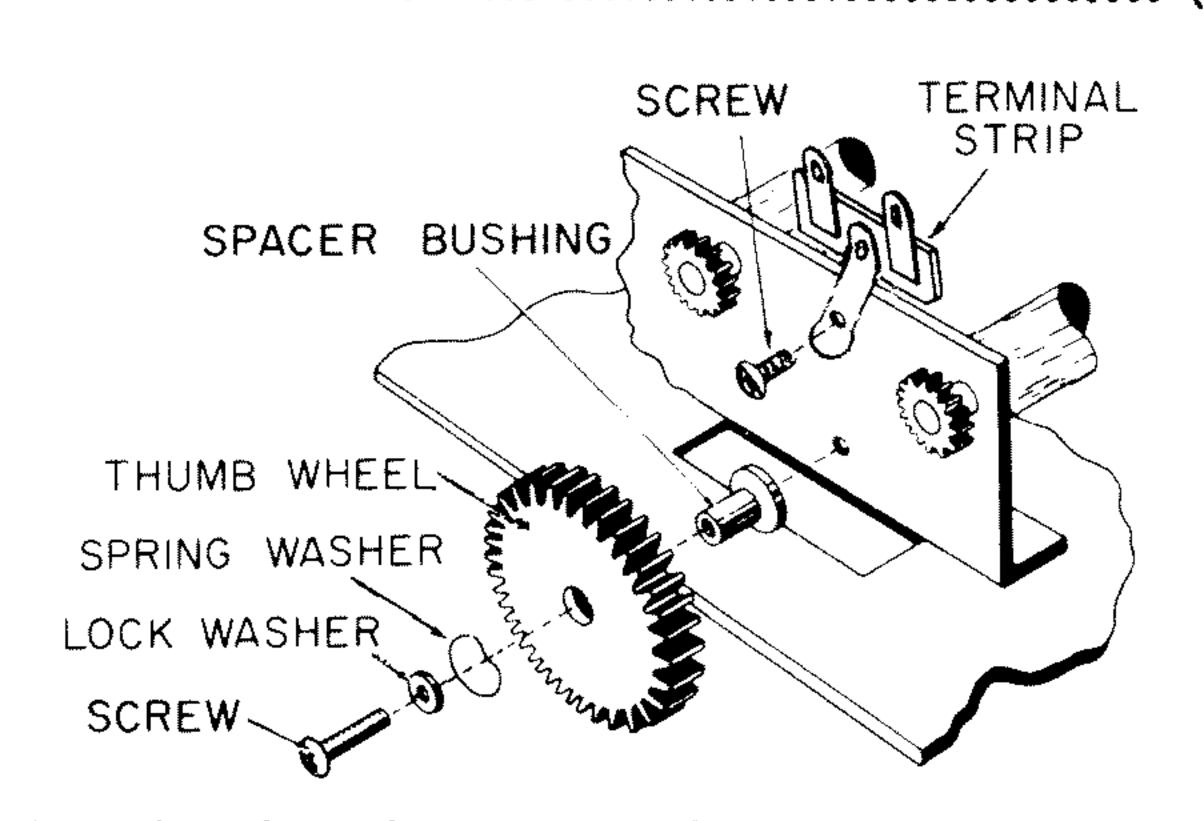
Attaching the spacer bushing, thumb wheel, lock-washer and screw to geared roll chart bracket.
